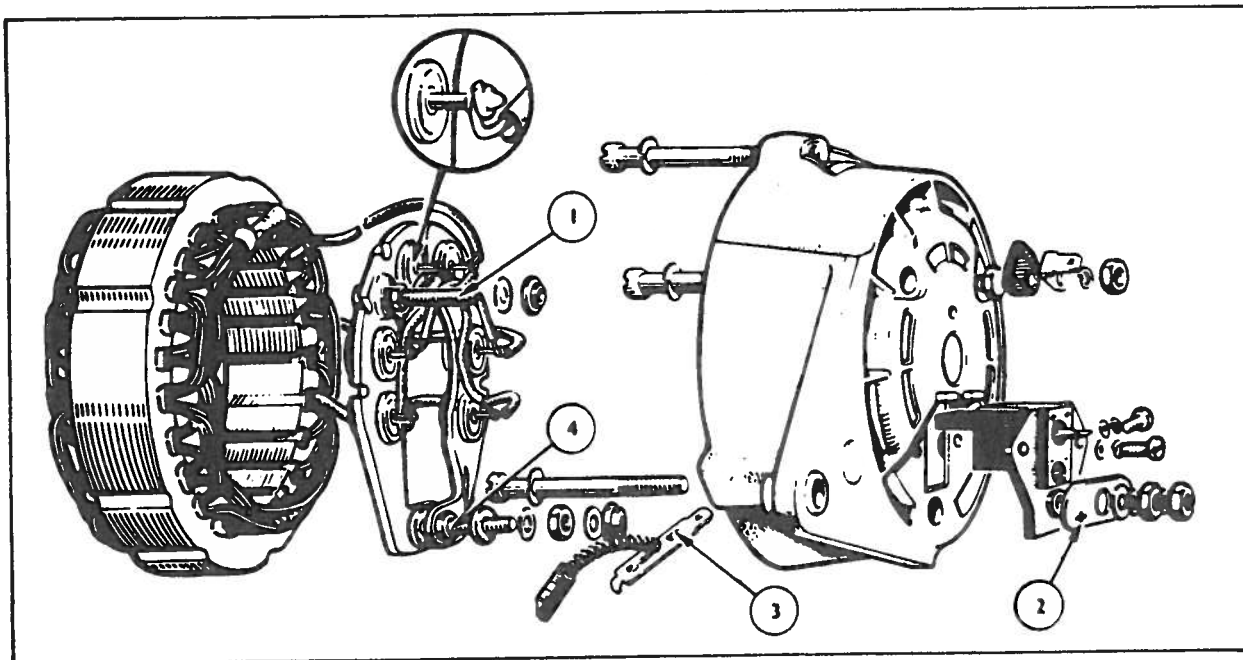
Slip-Ring End, showing Heat Sink withdrawn
